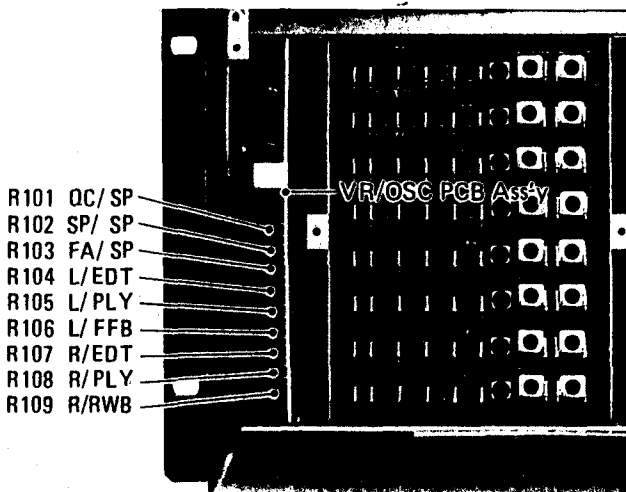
TAPE PENSION ADJUSTMENT RESISTORS
